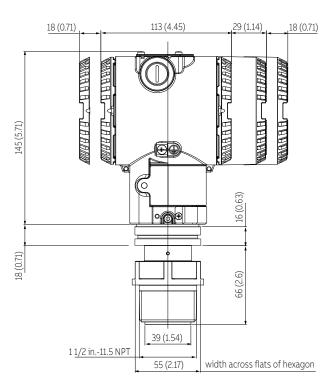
$\,\,$ 266HRH / 266NRH with barrel housing and direct mount seal S26KN pulp and paper 1 1/2 in. NPT threaded connections
